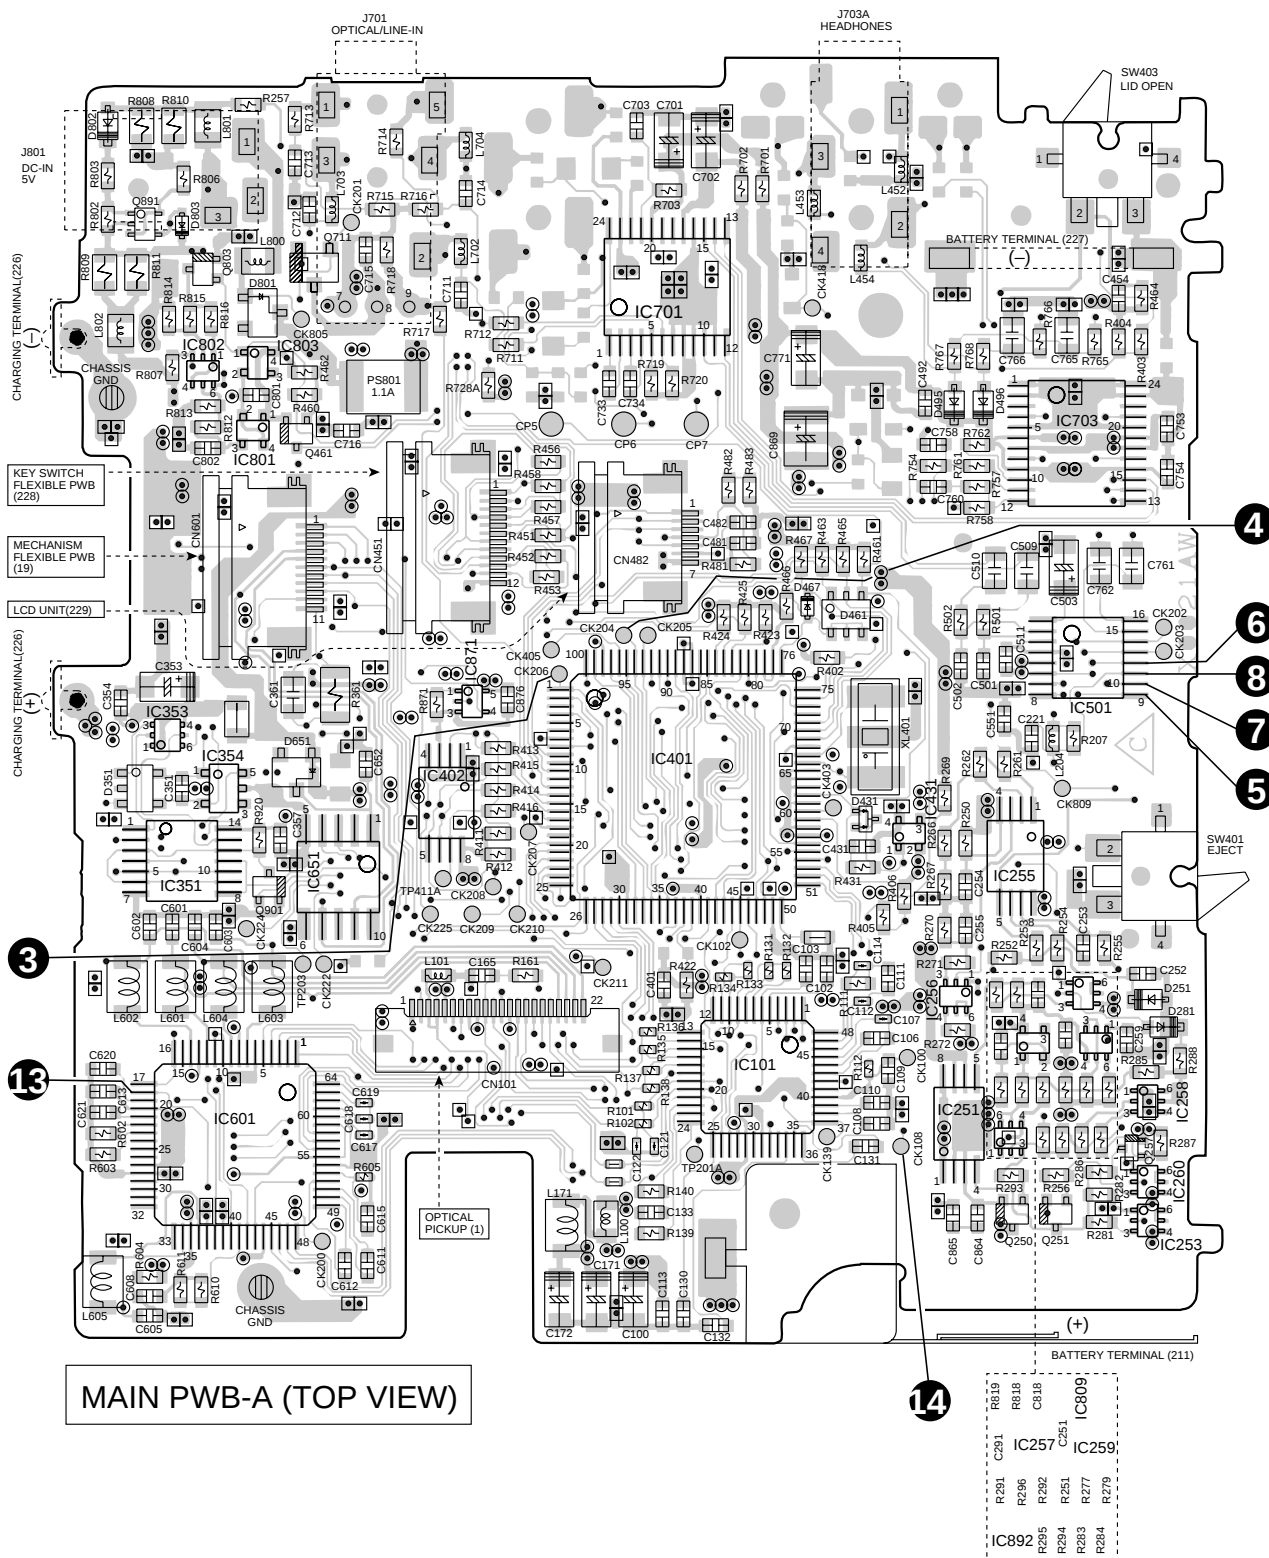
WIRING SIDE OF P.W.BOARD (4/11)
